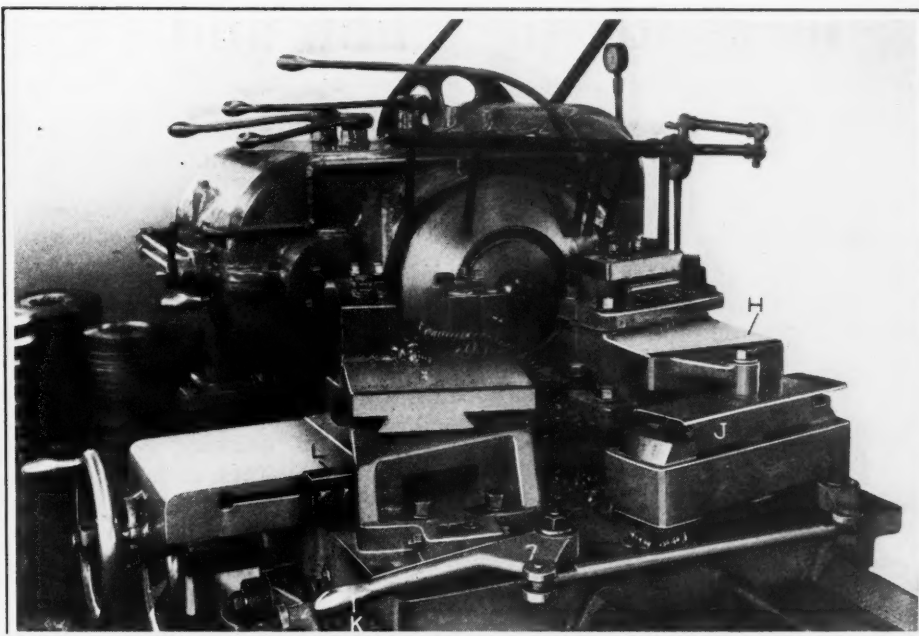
Tool Equipment Shown in Figs. 4 and 5, as Viewed from the Rear End of the Lathe
